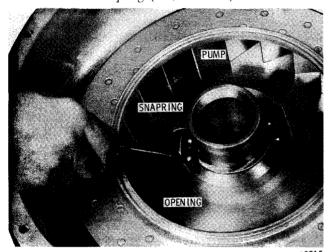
Removing (or installing) inner bearing snapring (VS2 series)
